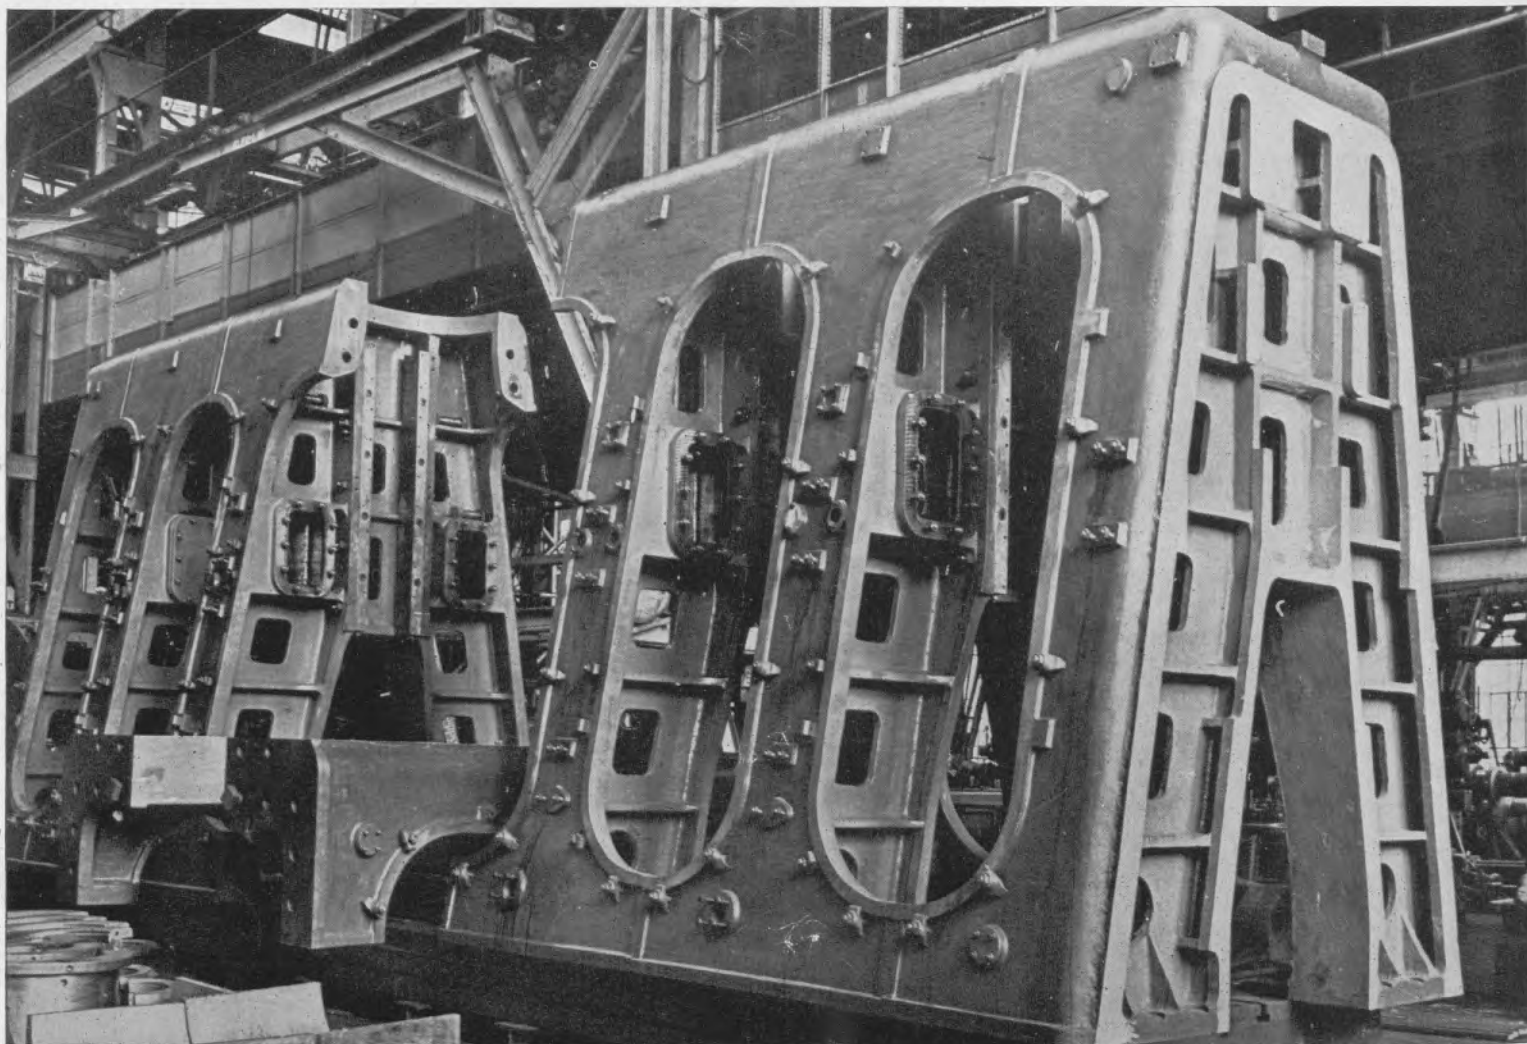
Sections of Sulzer framing, showing clearly the supports for the cross-head guides
